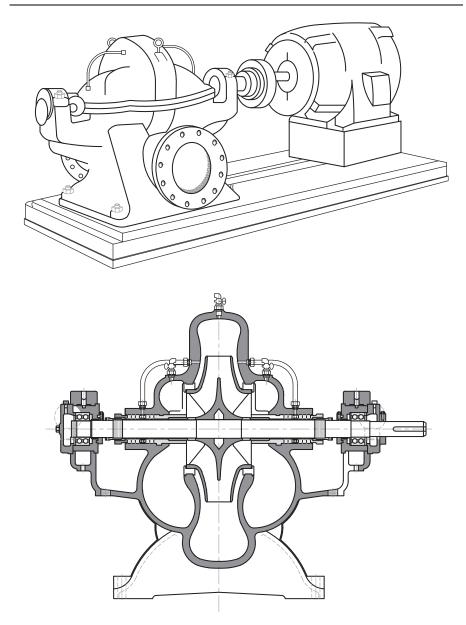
Horizontal, single-stage, double-suction, horizontal split case. (Top) Assembled; (bottom) sectional.
